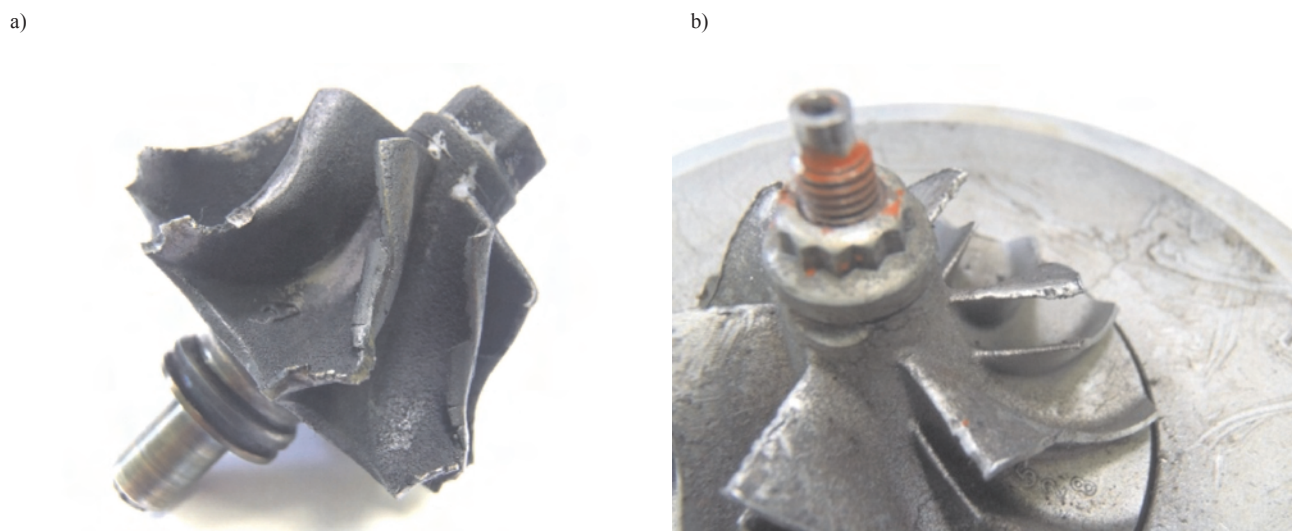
Damage to the turbocharger elements caused by a foreign body entered through the intake manifold: a) torn shaft with damaged turbine vanes, b) compressor rotor with damaged vanes
